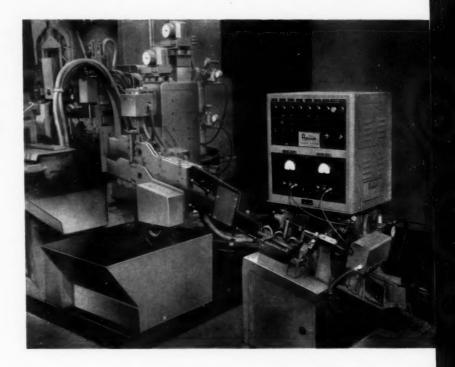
Electronic gage seen at right checks the chamfers on gear blanks and ejects unsatisfactory parts from the production line.
